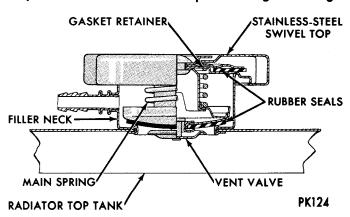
Radiator Pressure Cap—Coolant Reserve System (Cutaway)
